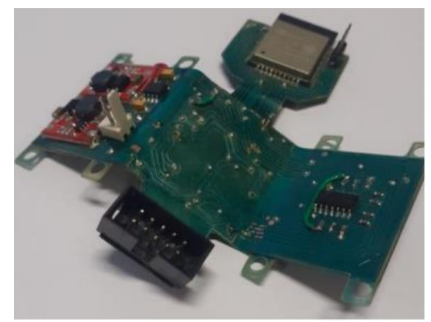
shows the views of the PCB project, the PCB inserted in the box after manufacture respectively, while Figure 12 shows the manufactured board.
